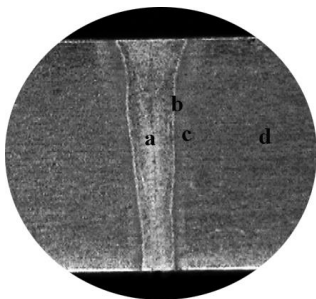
Macrostructure of Laser Beam Welded 409M Ferritic Stainless Steel
